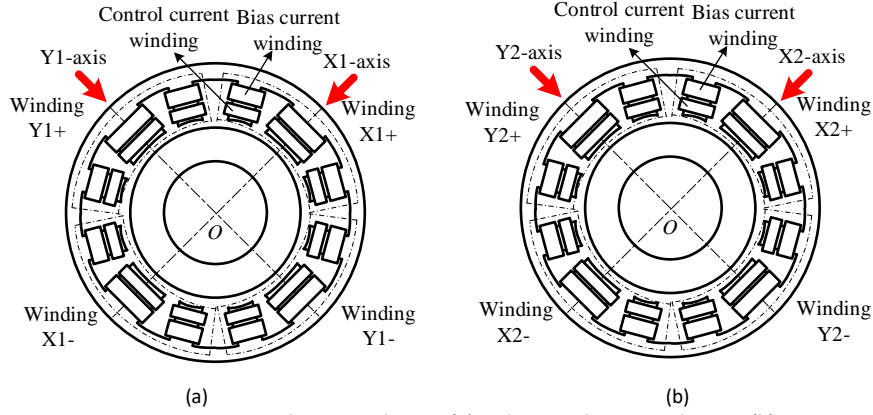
Front end magnetic bearing(a) and rear end magnetic bearing (b).
